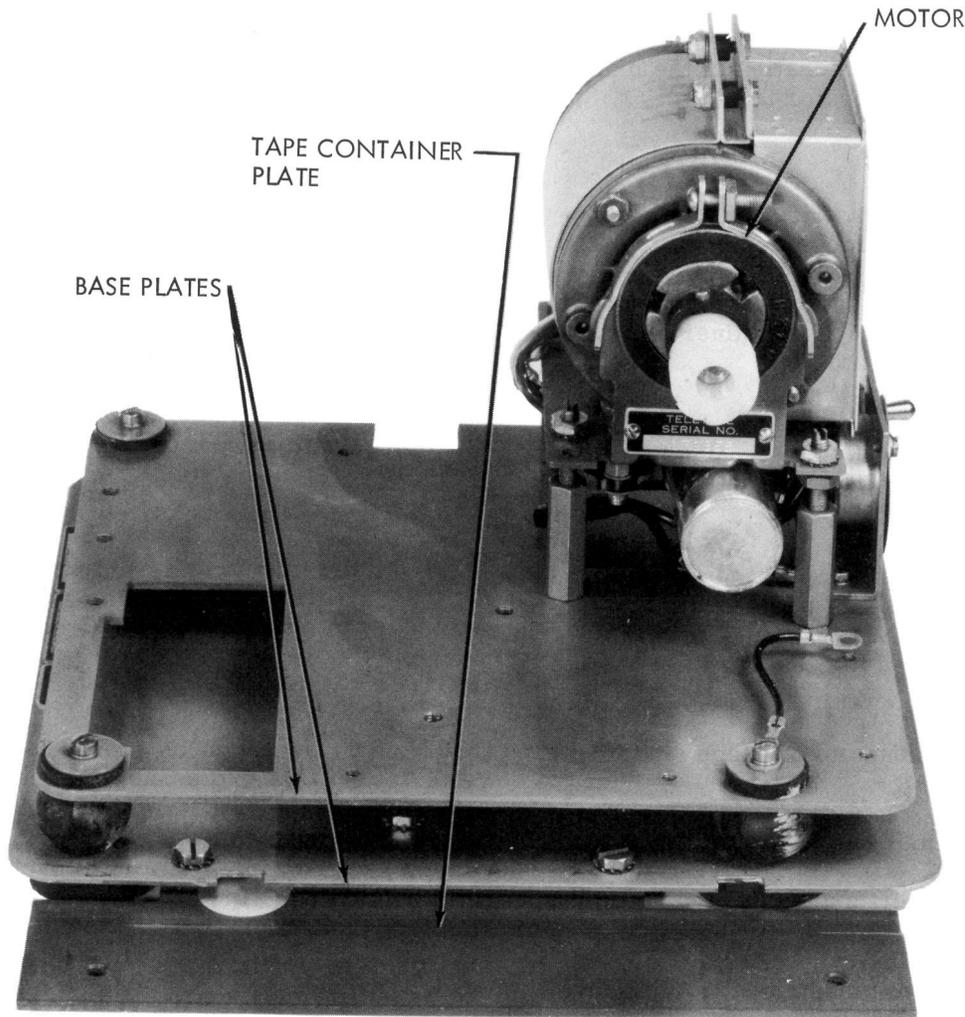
Parallel Input Tape Punch Base with Motor Unit
